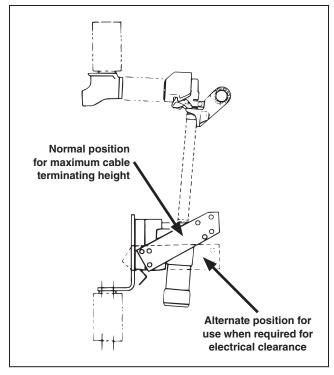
The fuse assembly showing the alternate arrangement of the two-position cable-terminator adapters.
